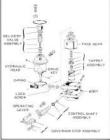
PSU PUMP (EXPLODED VIEW)
